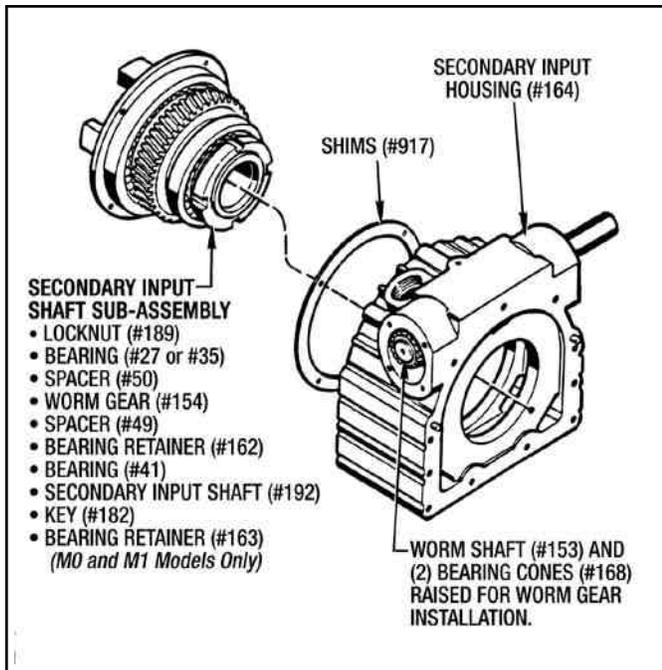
Installing Secondary Input Shaft Sub-Assembly
